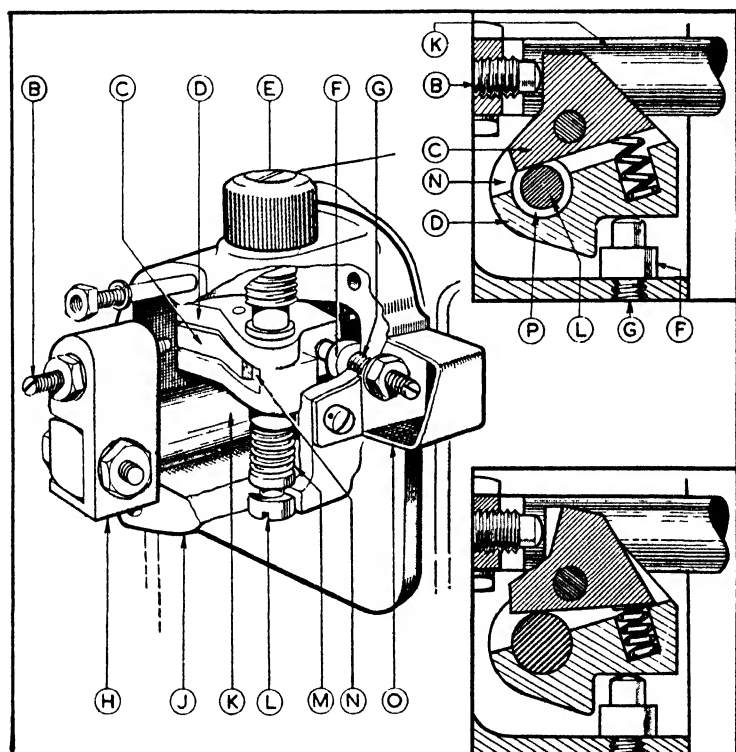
MECHANISM OF C.A.V. DEVICE DESIGNED TO AUTOMATICALLY SUPPLY EXCESS FUEL TO THE ENGINE AT STARTING.
